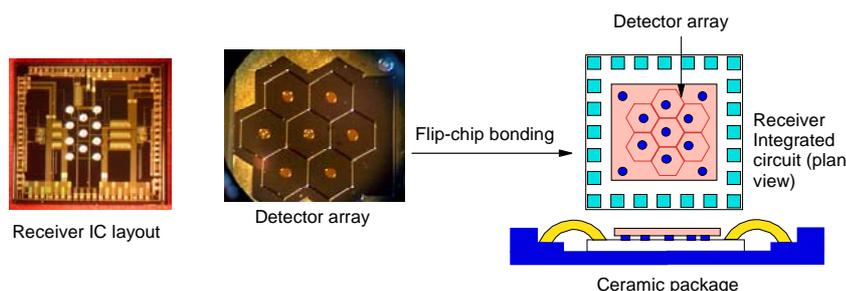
Integration of optoelectronic components, showing flip-chip compatible receiver array, detector array and packaging.
